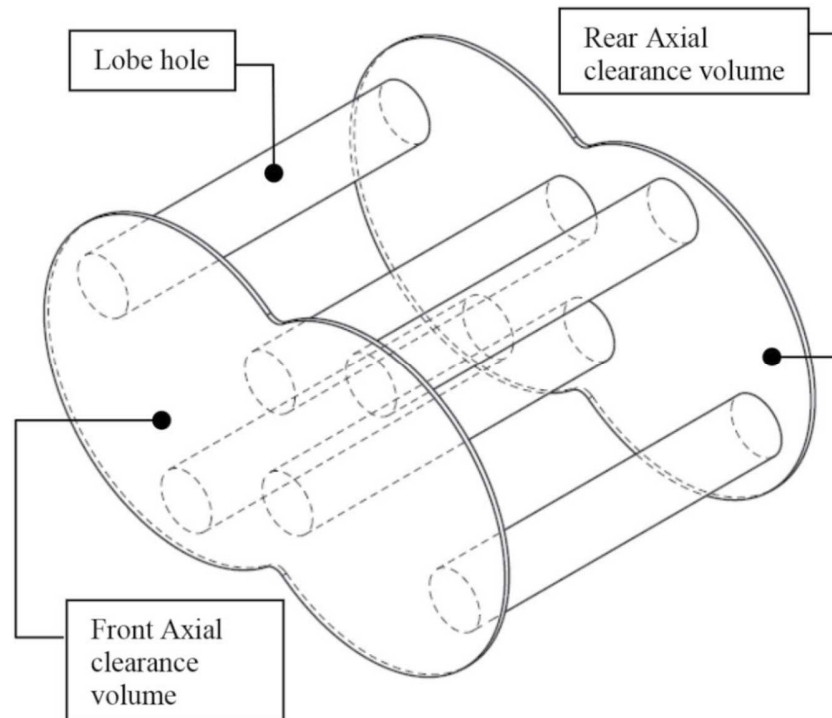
Lobe holes connecting axial clearance volumes at each end of the rotors [24]
